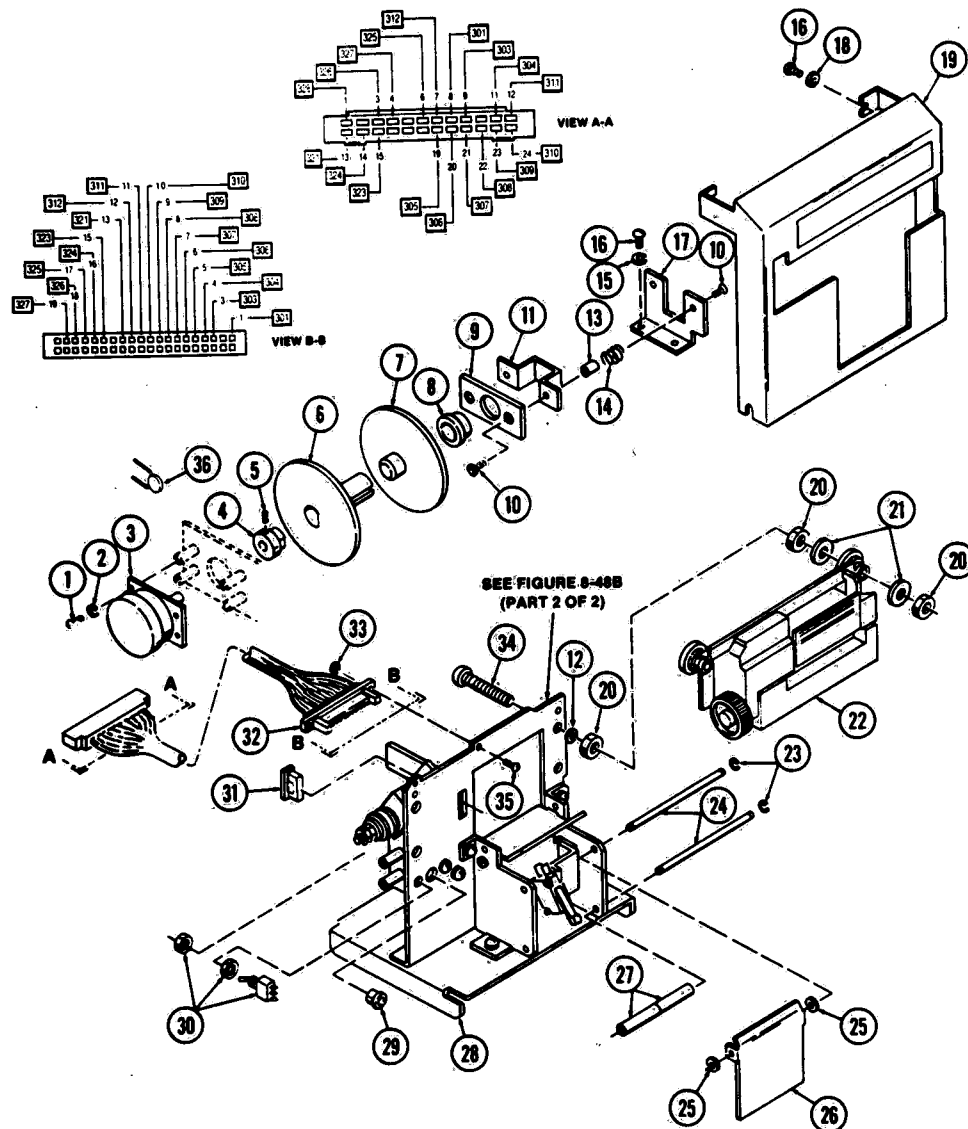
A. PRINTCON PRINTER ASSEMBLY (Part 1 of 2, Units After 6/85).
